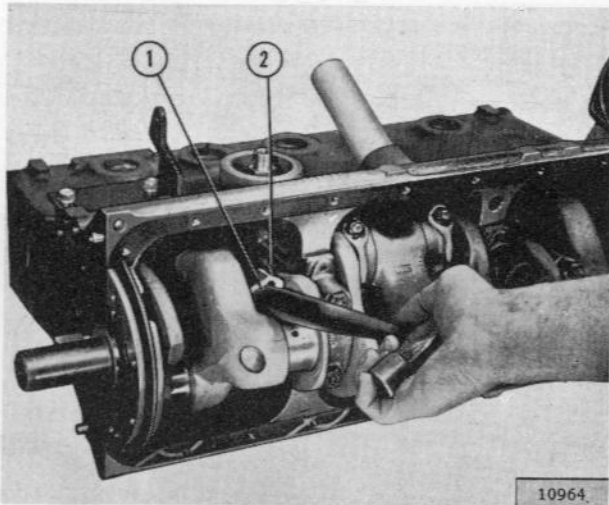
REMOVING PISTON AND CONNECTING ROD ASSEMBLY
